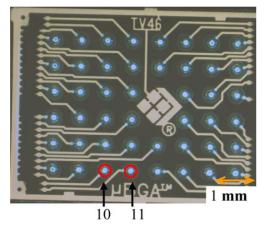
Optical micrograph of the general view of a  $\mu$ BGA package from the bottom side showing the solder balls attached with the Cu traces on the  $\mu$ BGA substrate.
